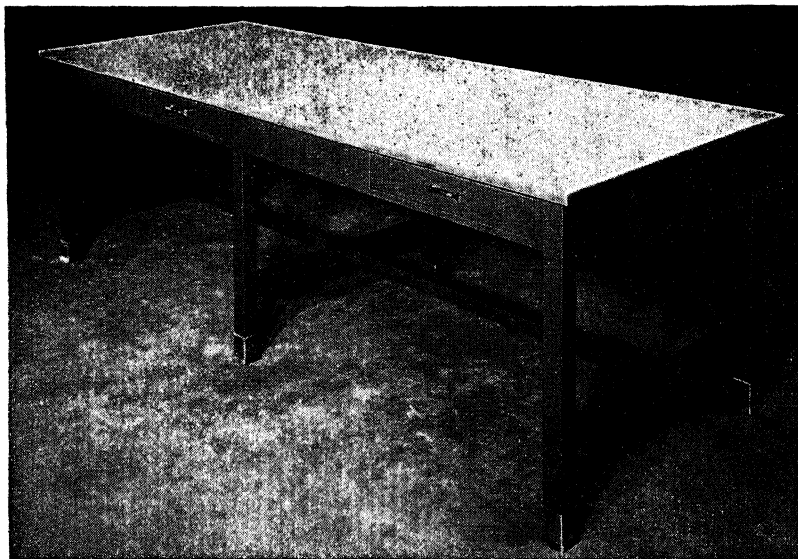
Laboratory table built from galvanized sheets welded by the carbon arc process with tinned copper alloy feeder rod.
